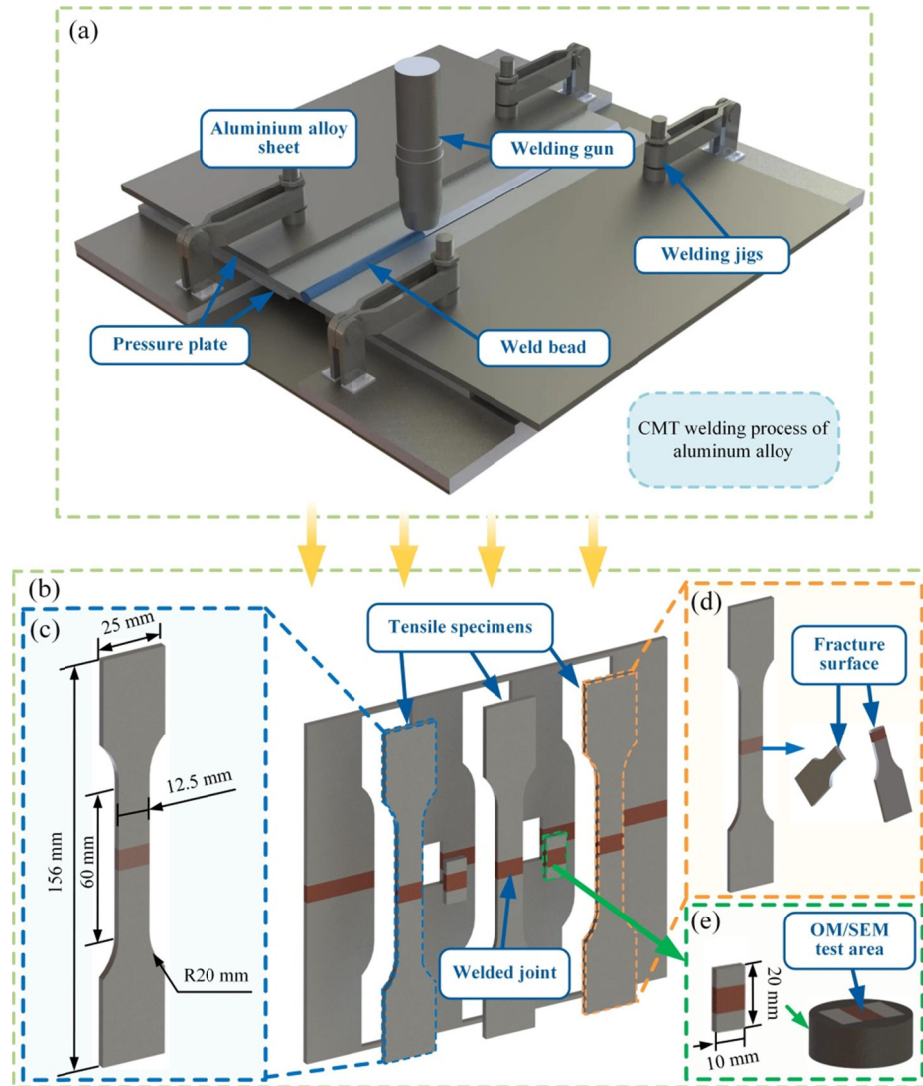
Specimen preparation: (a) Welding process; (b) Schematic diagram of tensile specimens cutting; (c) Dimensions of tensile specimen; (d) Schematic diagram of fracture morphology testing; (e) OM/SEM specimen.
